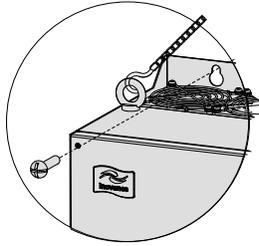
Hoisting the IS300 (sheet metal housing)
